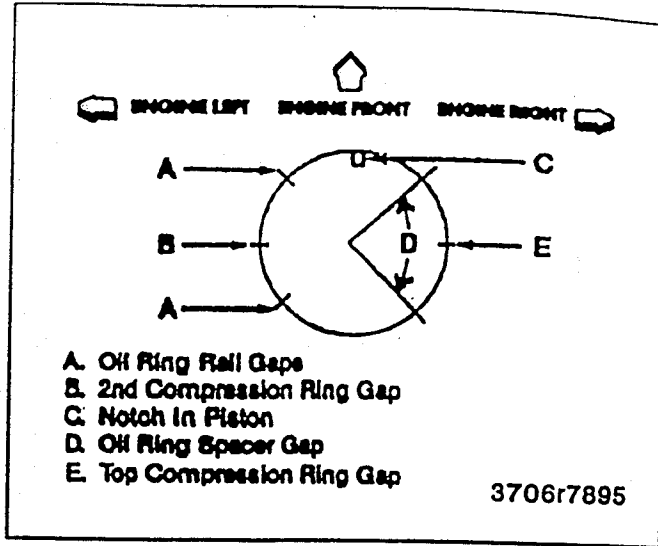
Piston Ring End Gap Location (5.0L and 5.7L Engines)
